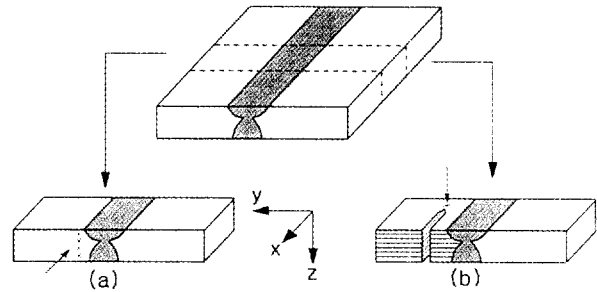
Measurement of welding residual stress through thickness; (a) Kajimoto's way [13] and (b) the method used in this study.
